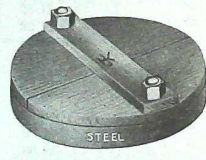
Steel showing Wooden Flange Protectors Bolted on
